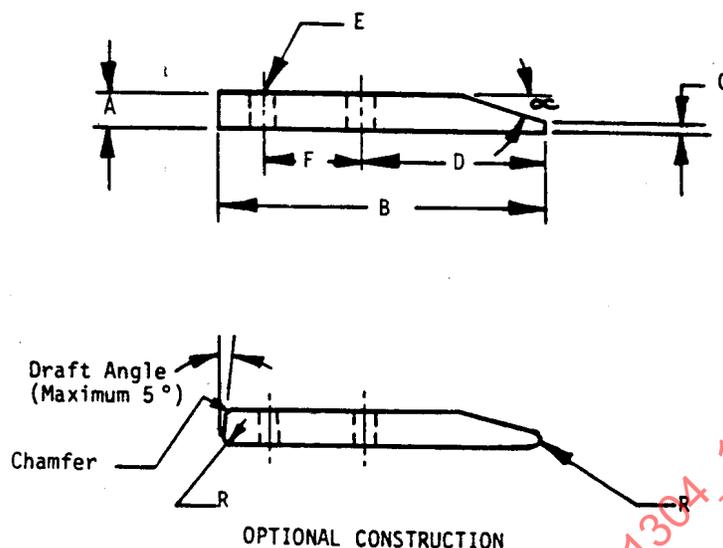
DIMENSIONS ASSOCIATED WITH LOADER STRAIGHT CUTTING EDGE SECTIONS WITH BOLT HOLES
